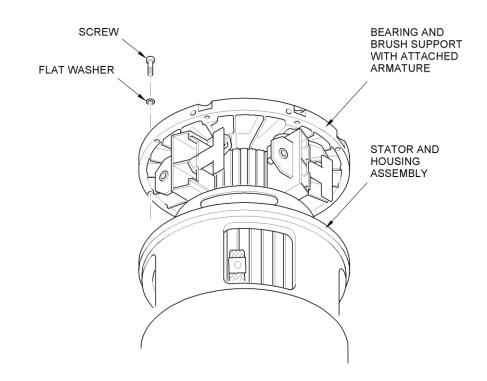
Installing the Bearing and Brush Support Assembly with Attached Armature to Stator and Housing Assembly (Non-Preload)
